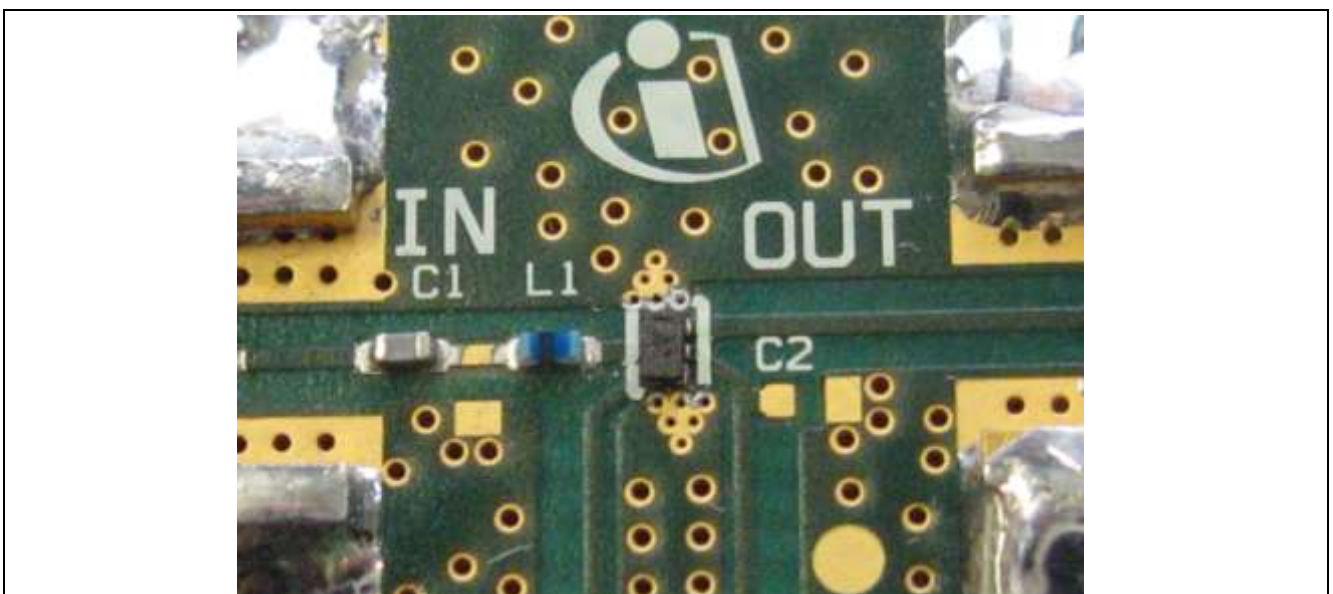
Photo Picture of the Evaluation Board (detailed view)
